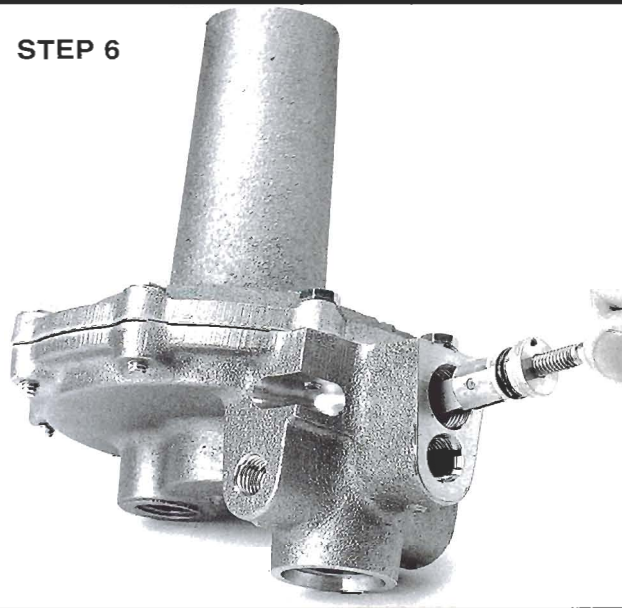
Pull the Pivot & Lever Assembly out of the Pilot Body.
